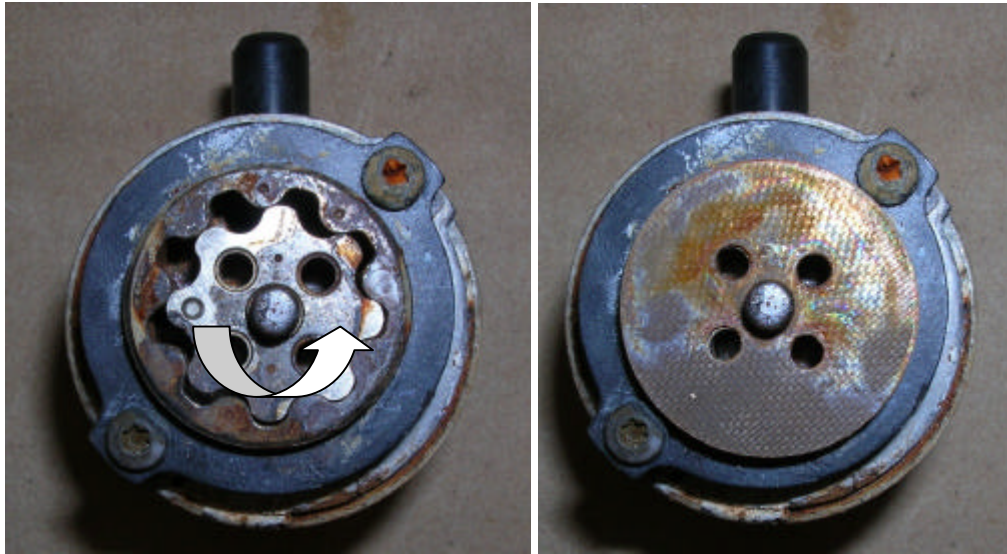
Dodge Neon fuel pump internal gear and disk valve.
